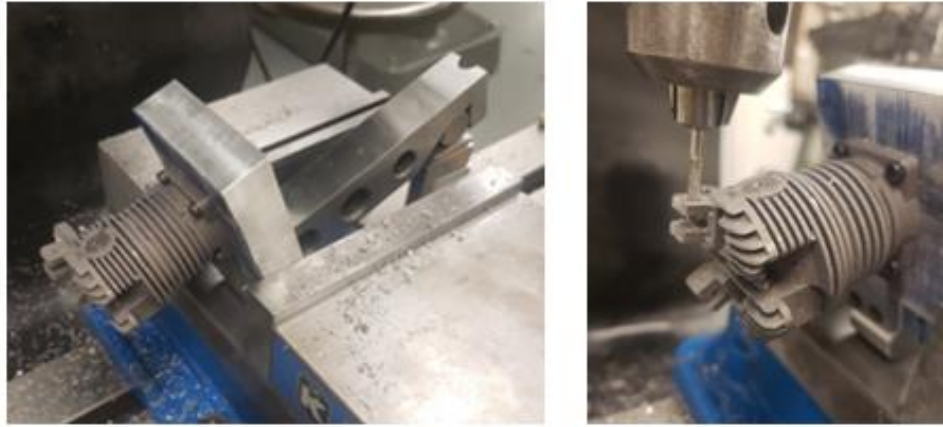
Setup for rocker flange holes (left), representation of tapping feature 3 though feature 4 (right)
